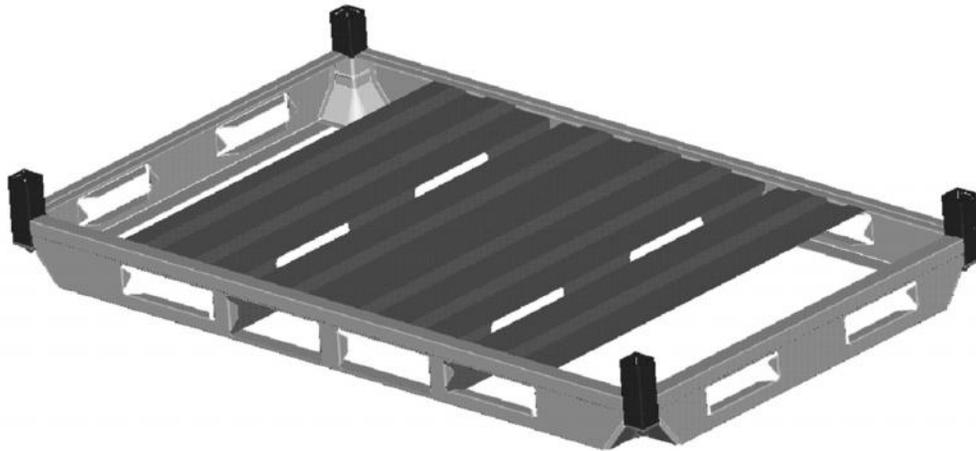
A so-called Weibulls rack frame, consisting of a sheet steel structure and a profiled panel in-between with deep drawn corner pieces and welded tubes
